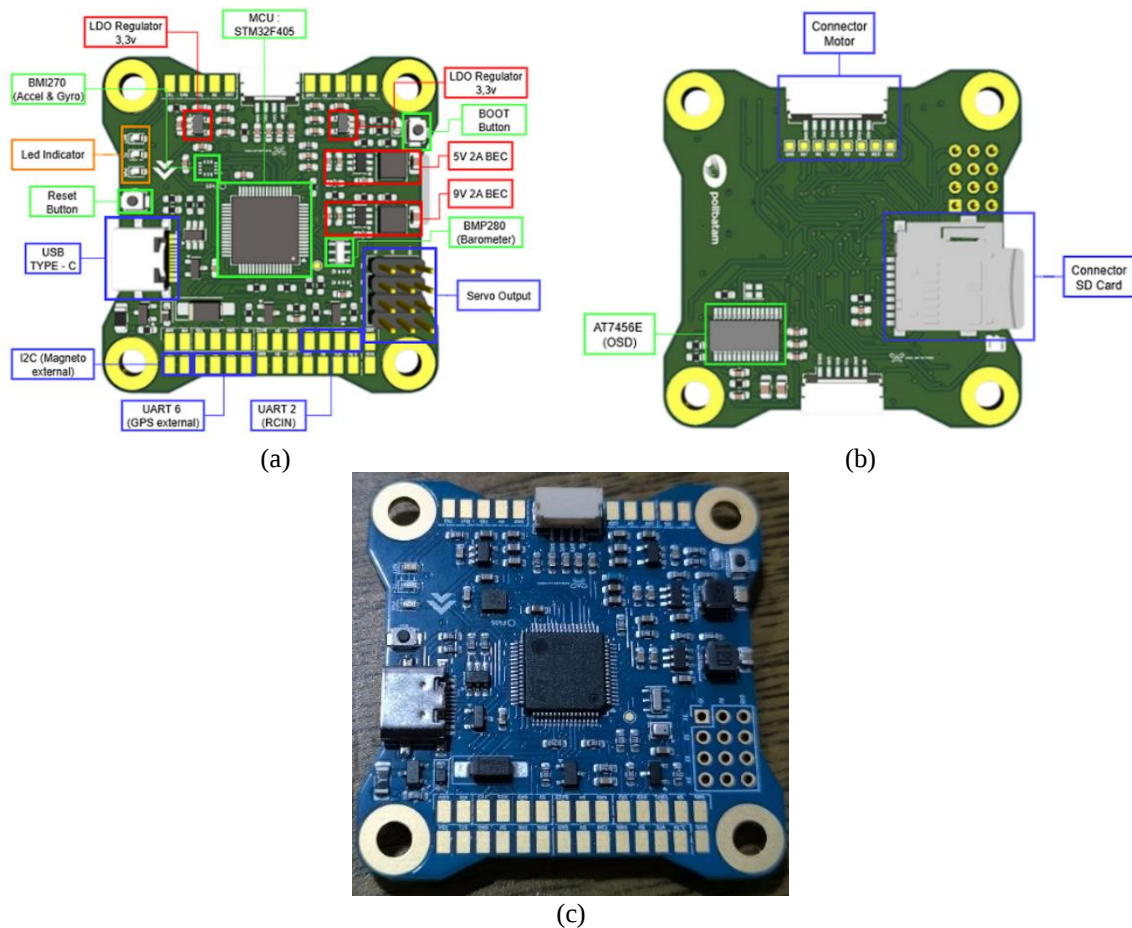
Custom Flight 3D Design PCB flight controller: (a) Top side, (b) Bottom side, (c) Physical realization of the designed PCB
